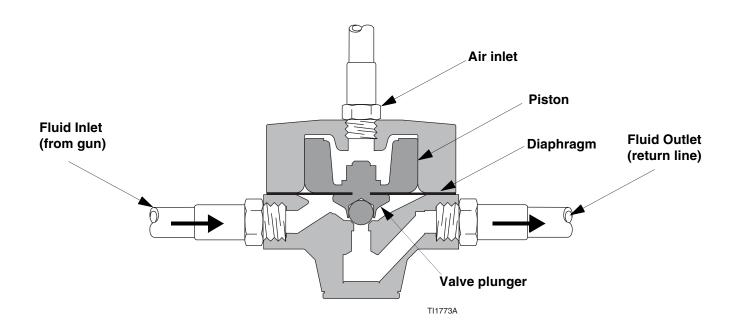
Cutaway of Pneumatic Back Pressure Regulator
